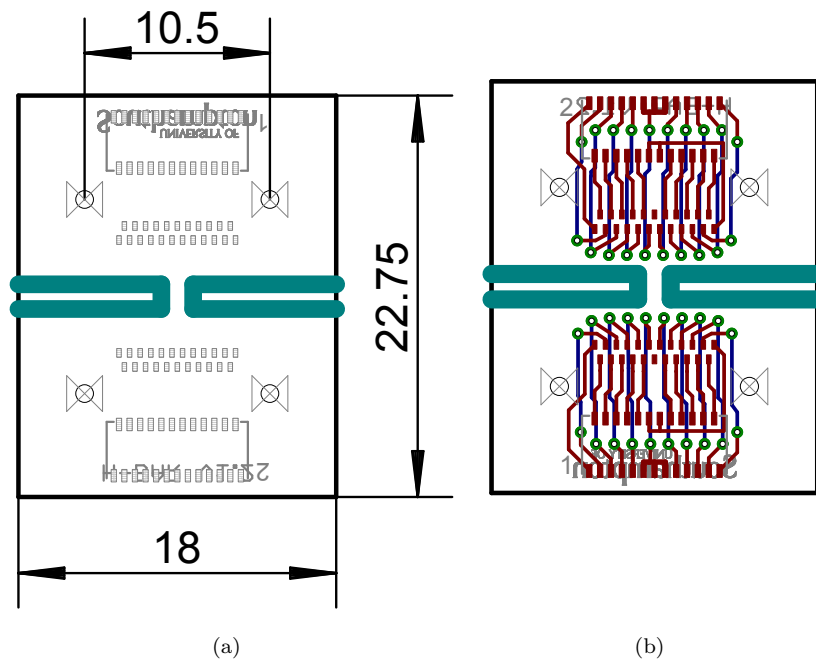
(a) H-Bar PCB v1.2 Dimensions (Silkscreen layers). (b) H-Bar PCB v1.2 Layout (Top copper layer red, bottom copper layer blue).
